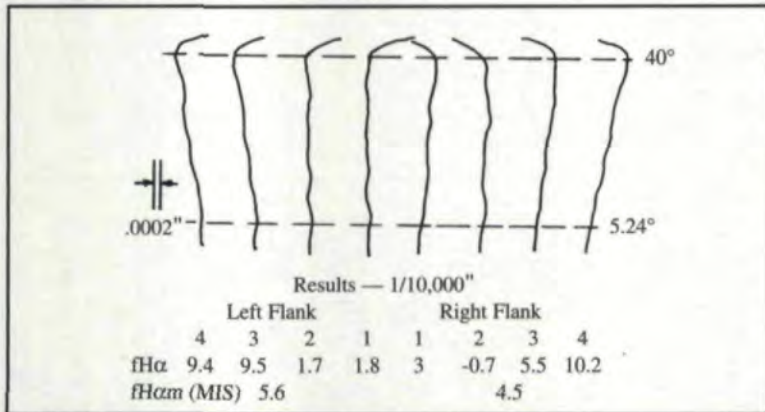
Involute tests of 12-tooth pinion from noisy gear set.
